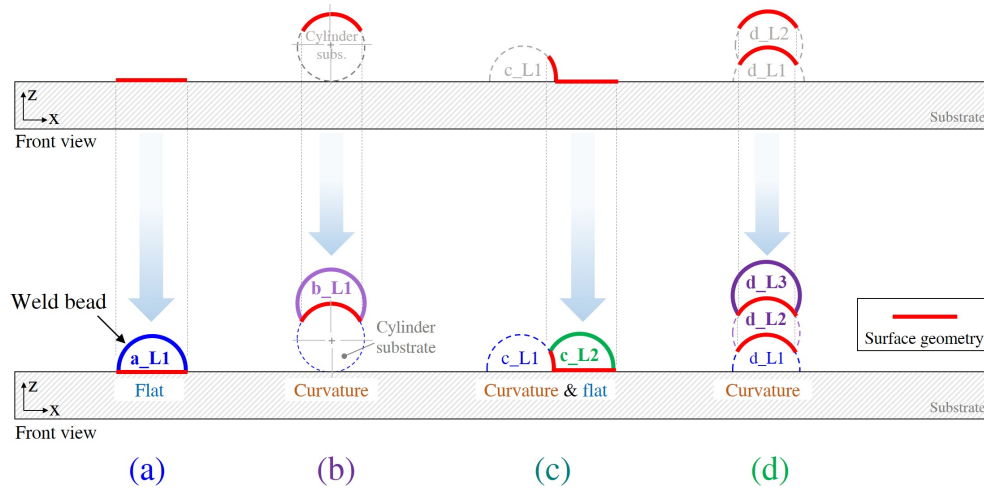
Configuration of the weld bead deposition for design of experiment; a) Exp.1: Single weld bead on flat substrate, (b) Exp.2: Single weld bead on the cylinder substrate, (c) Exp.3: Lateral overlap weld bead and (d) Exp.4: Vertical overlap weld bead.
